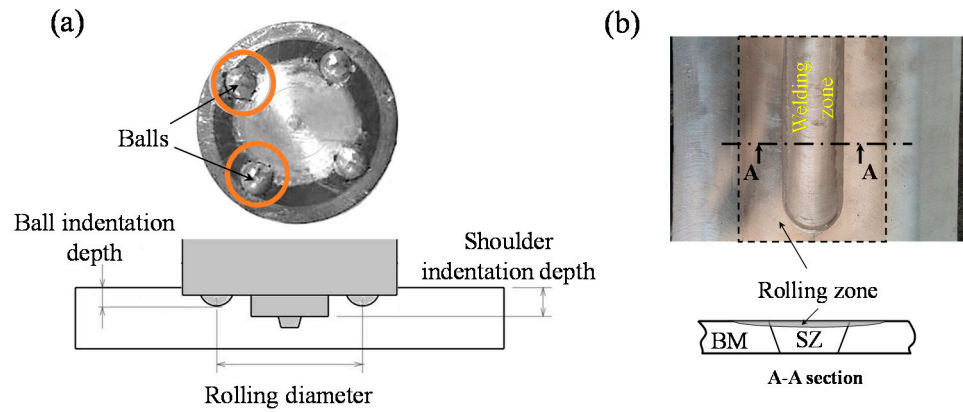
(a) Rolling tool and schematic view of tool-joint; (b) top view of the rolled joint and its cross-section.
